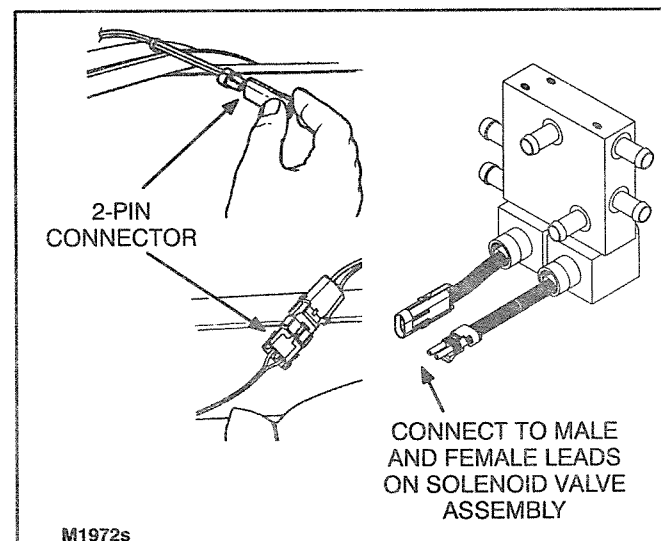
SOLENOID VALVE ASSEMBLY HARNESS CONNECTIONS
